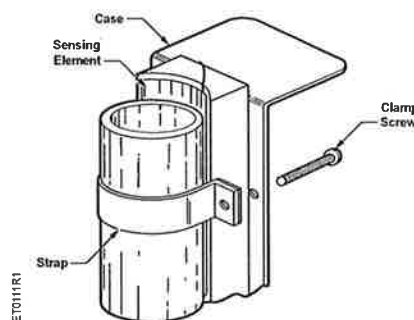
Skeleton View of Control Case, Temperature Sensing Element, and Mounting Strap.
